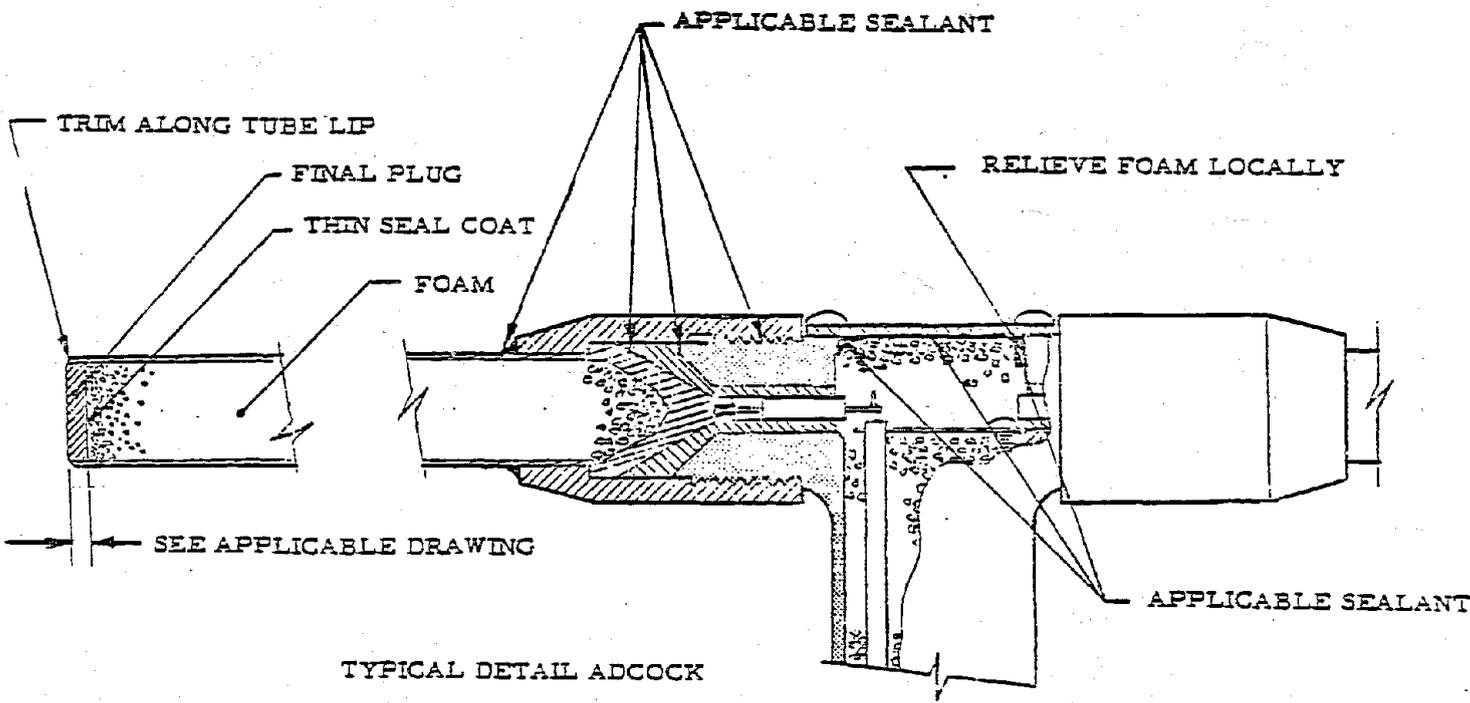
TYPICAL DETAIL ADCOCK
